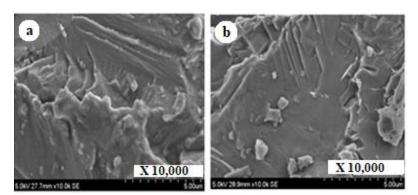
Fracture surface (a) Ti surface (b) Al surface
